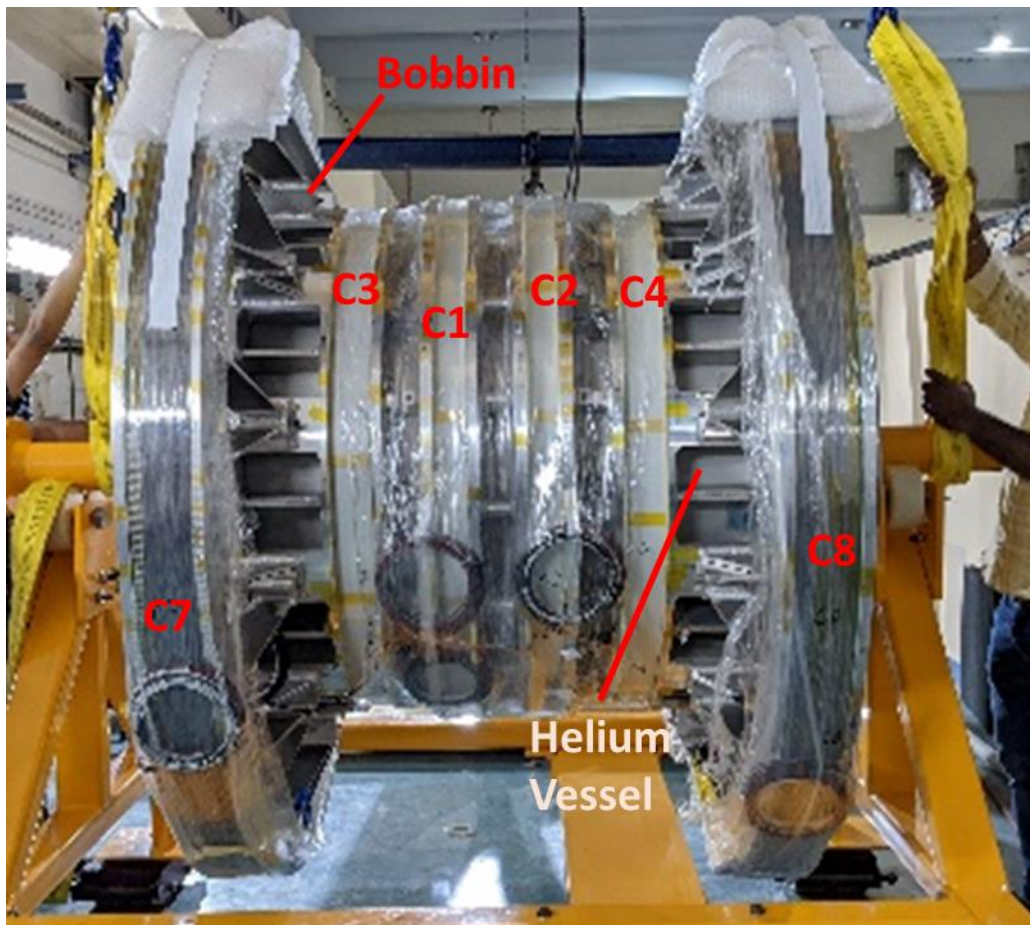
The finished magnet on a jig before assembly inside a helium vessel.
